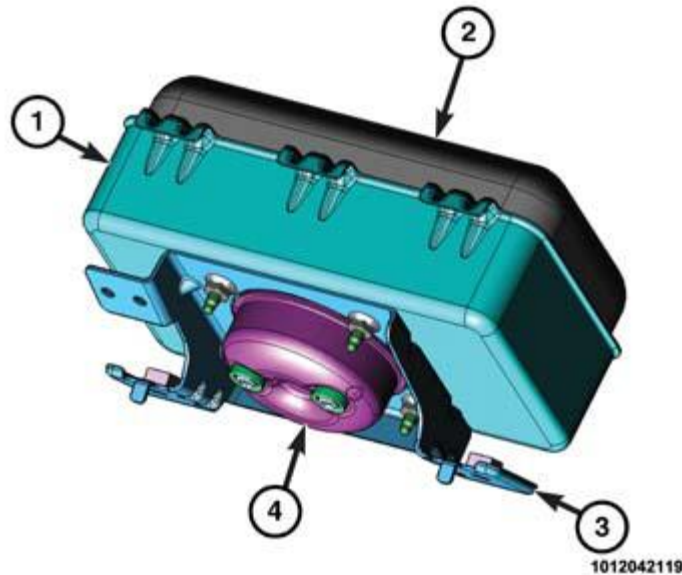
PAB Housing, Airbag Cushion, Mounting Bracket & Inflator
